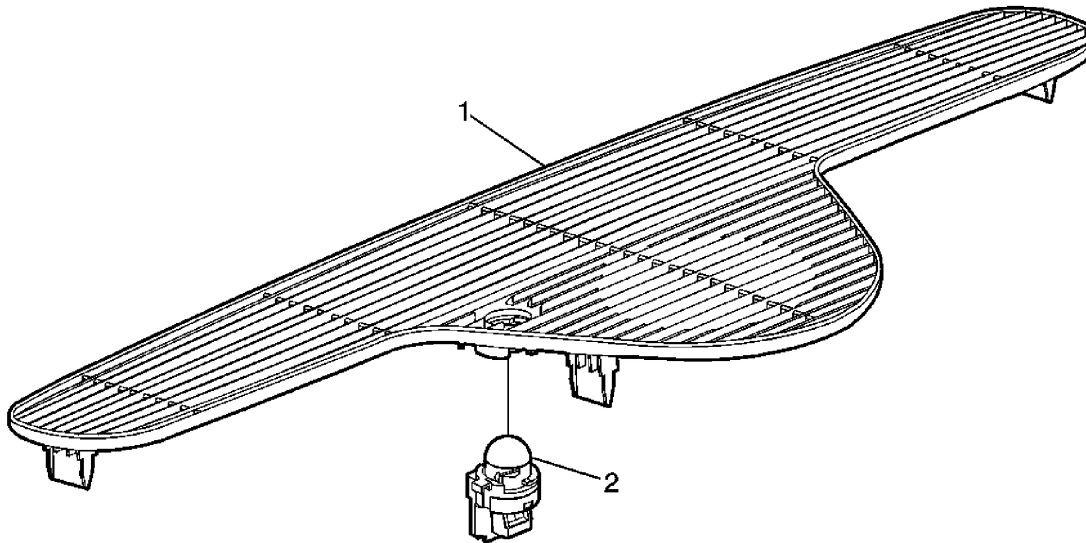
Defroster Grille Assembly & Sunload Sensor Assembly
